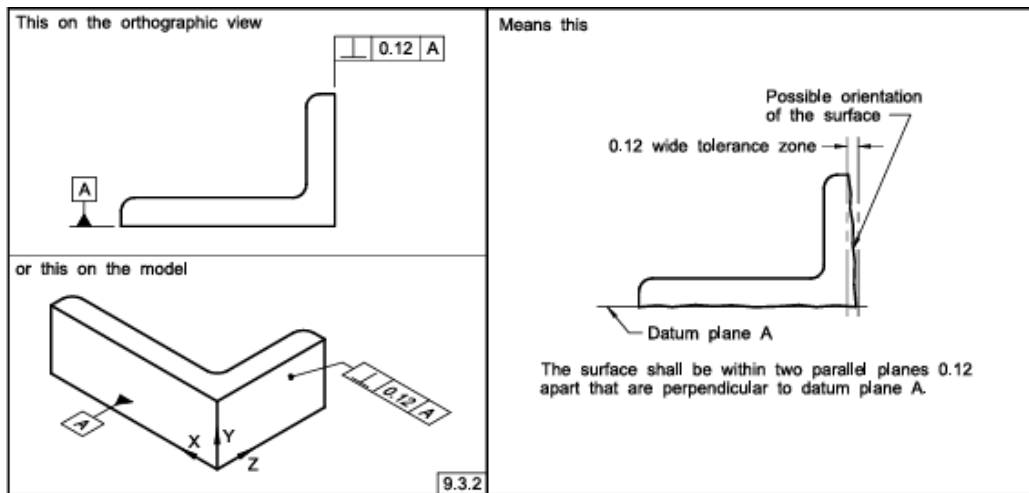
Specifying Perpendicularity for a Plane Surface
